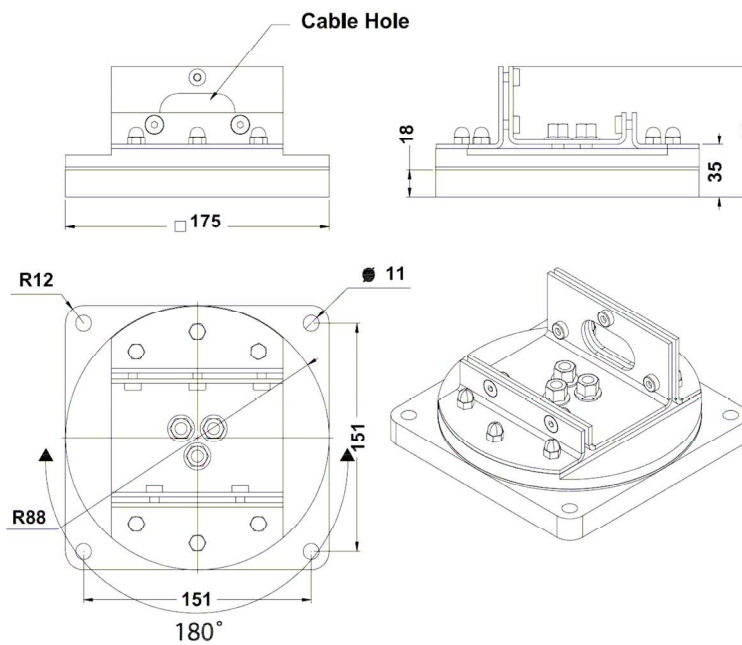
19"/23" TFT Hatteland JH19T14/JH23T12 MMD. Rotary Bracket View
